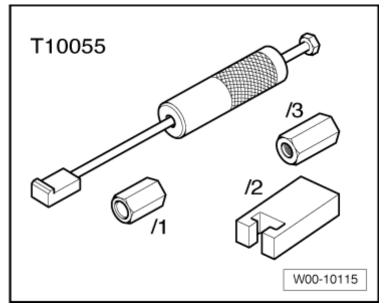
Identifying Puller T10055 With Adapter T10055/3
